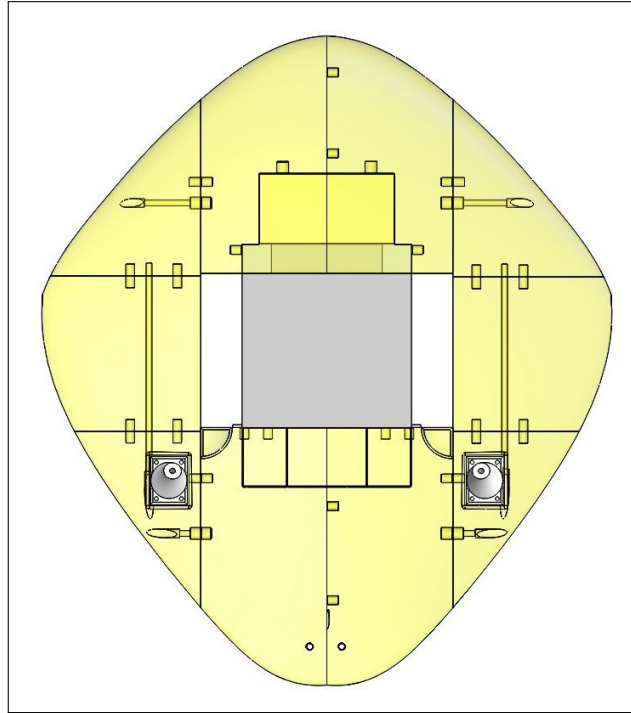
Bottom view of body wing assembly showing cavities included in the wing for mounting hardware
